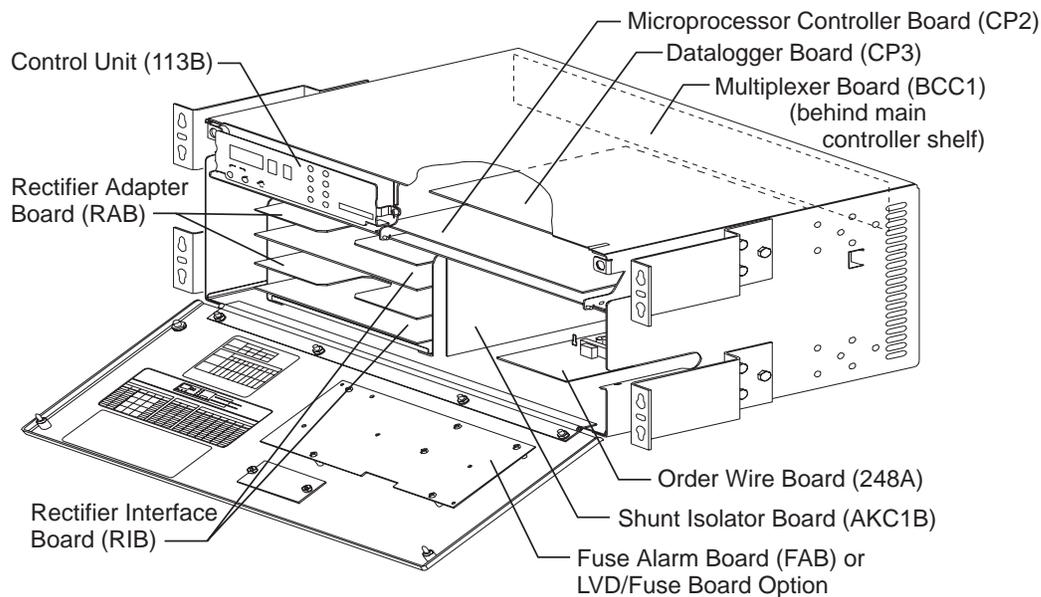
Front View of ECS-12U Controller (Door Shown in Full Open Position)
